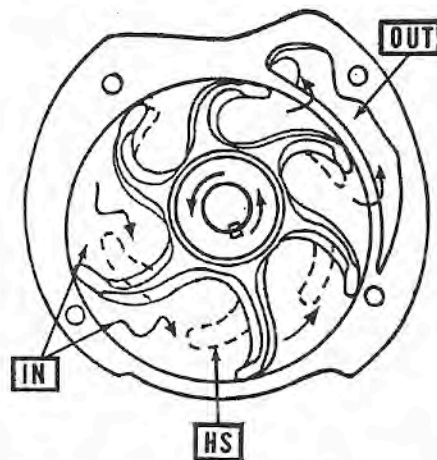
Schematic view of rubber impeller type water pump showing principle of operation. The offset housing and flexing impeller blades causes pump to operate by positive displacement at slow speeds. At high speeds, impeller blades remain curved (HS) and pump operates by centrifugal action.
